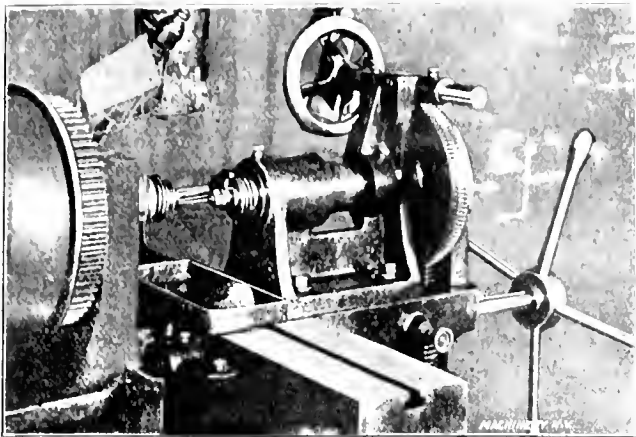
Milling Small Cams on a Machine equipped with Brown & Sharpe Cam Attachment
